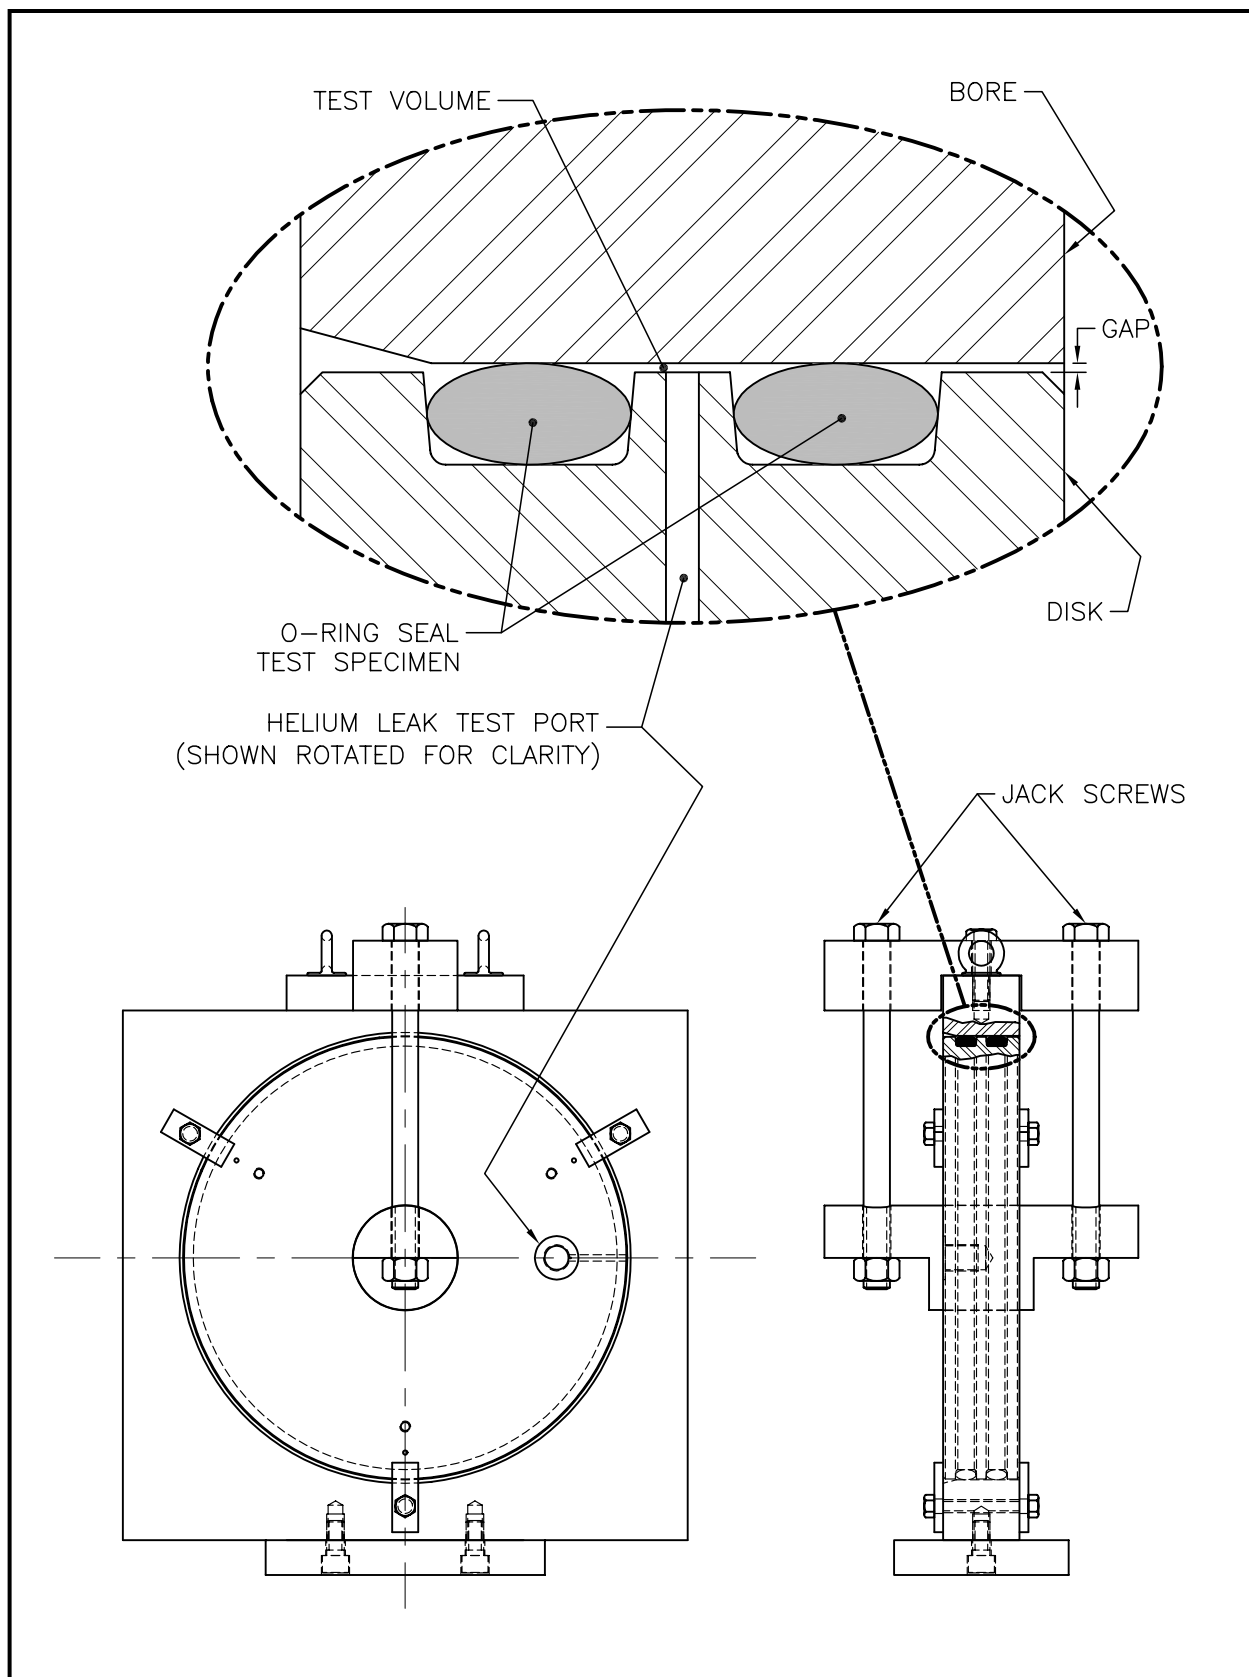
Test Fixture for O-ring Seal Performance Testing
